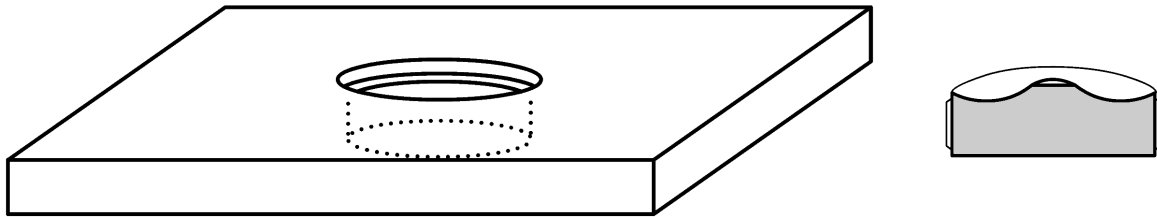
New mold design; plate with a screwed hole and toroidal inset with screw
